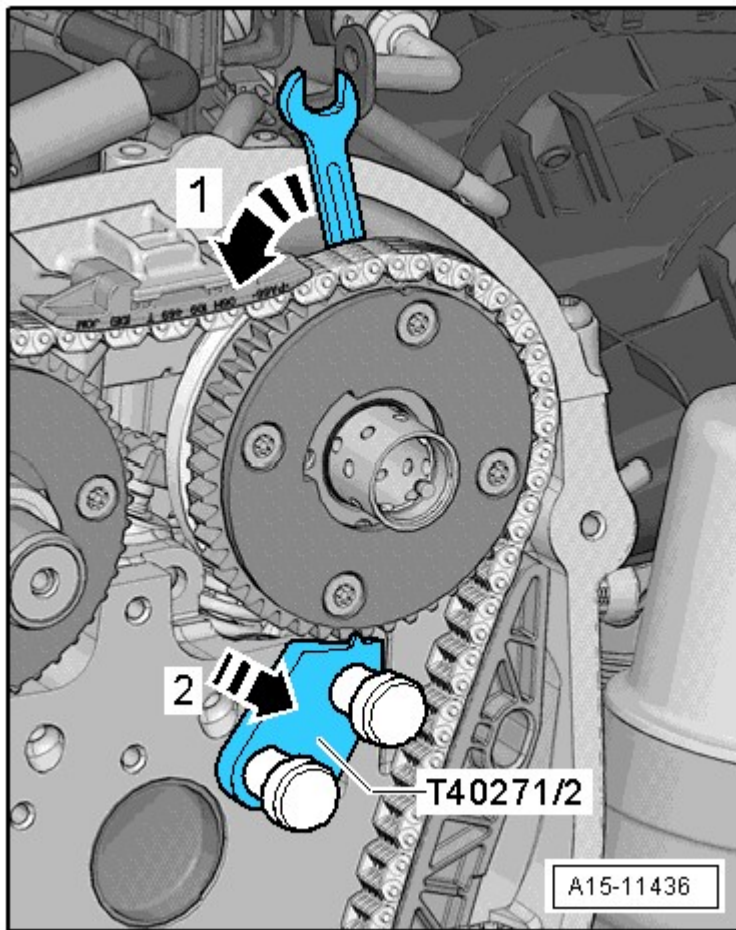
Turning Intake Camshaft In Direction Of Arrow
